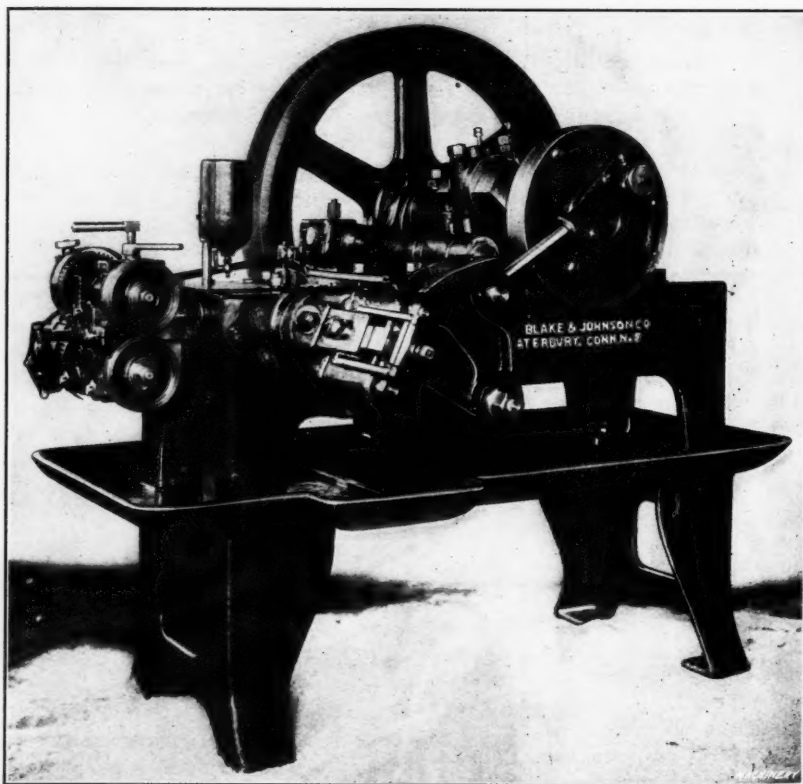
Double-stroke Solid-die Cold-header—Blake & Johnson Make
